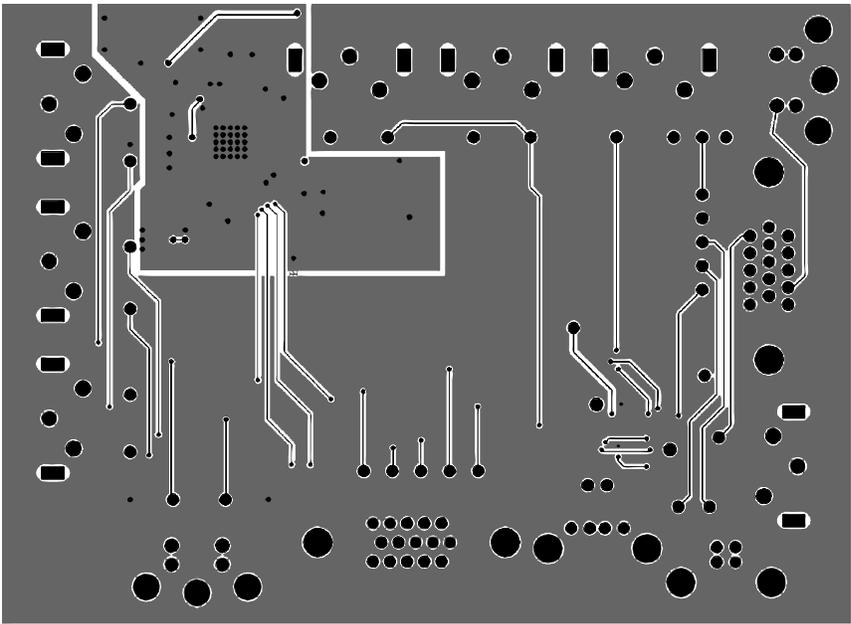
PCB Drawing, Layer 4 (Bottom Layer)
